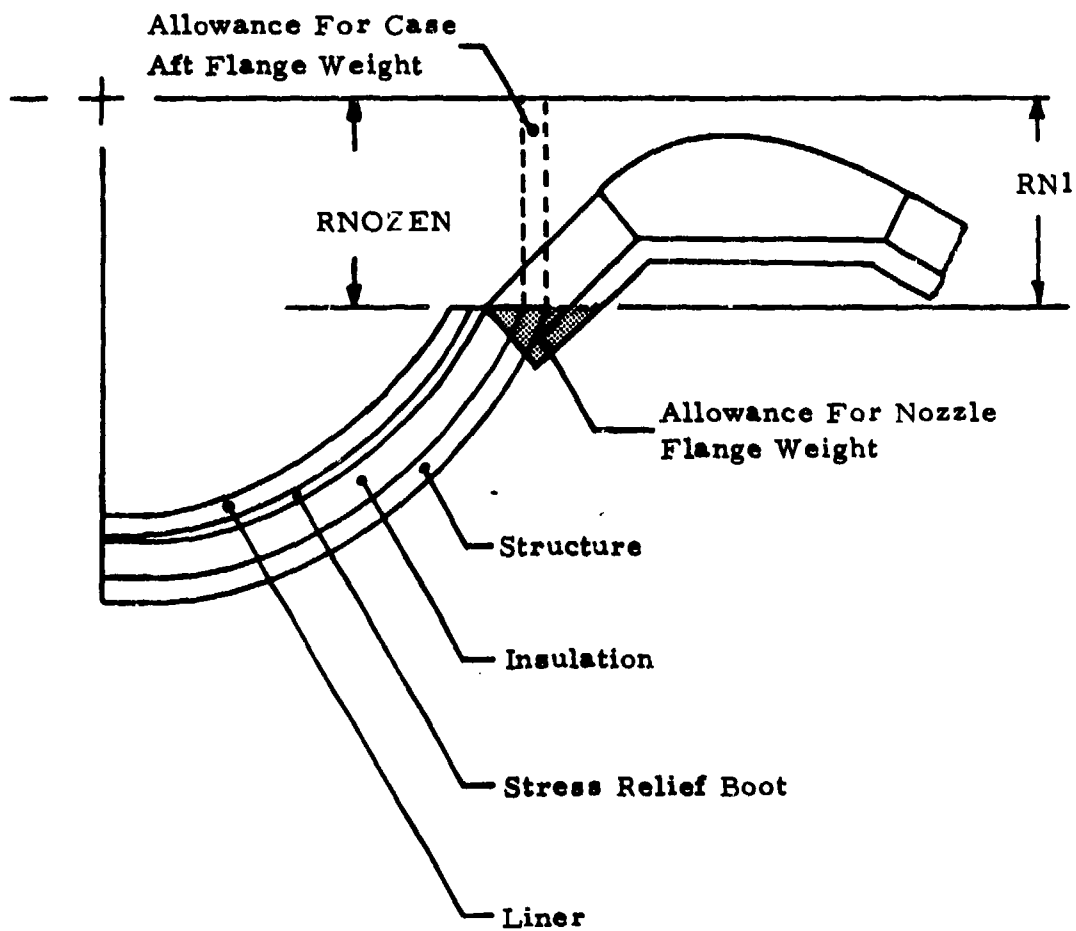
Dimensional Mismatch at Case-to-Nozzle Interface
